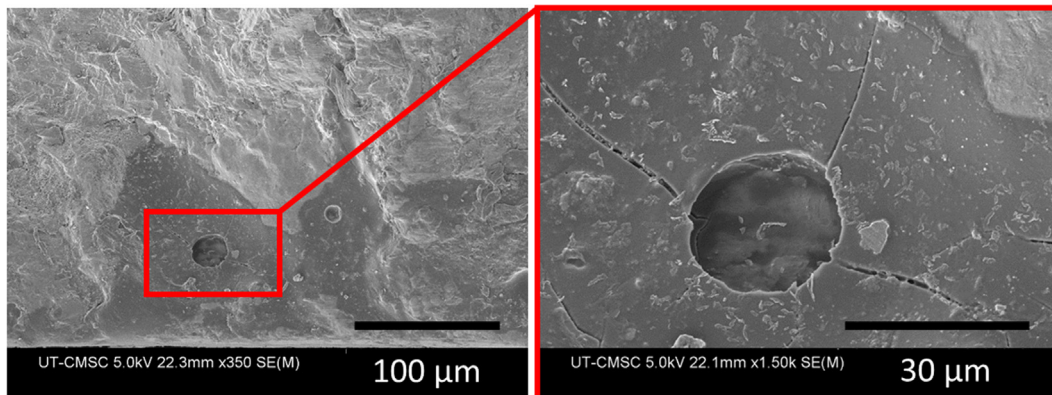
Representative of fatigue crack initiation location of an LB-PBF machined surface HIPed specimen fabricated with M290 under combined in-phase axial-torsion loading. The failure is due to a relatively large porosity caused by entrapped gas [6].
